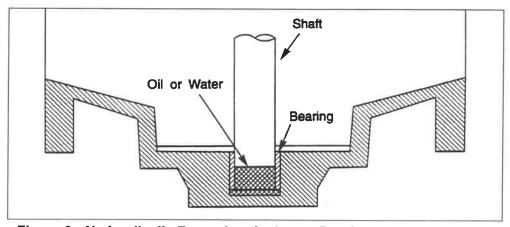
Hydraulically Removing the Lower Bearing in the Valve Body
